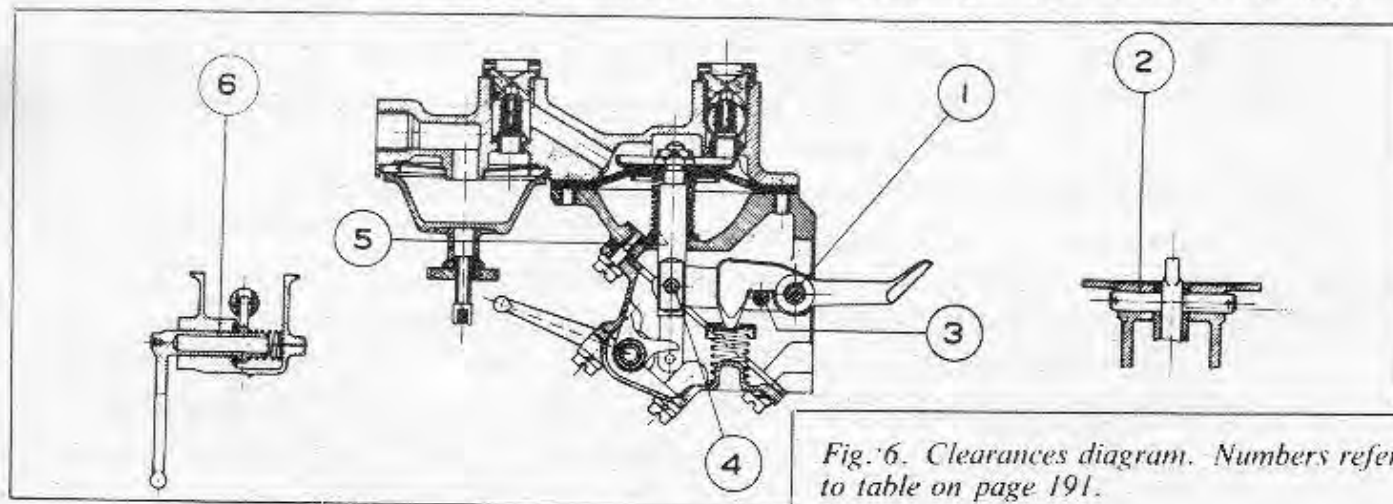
Clearances diagram. Numbers refer to table on page 191.
